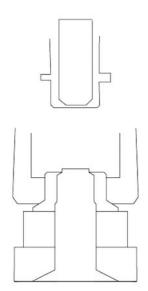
The parts are pulled tightly together with the flanged collar over the pin. Collar locks in grooves and the pin breaks away^[4]
